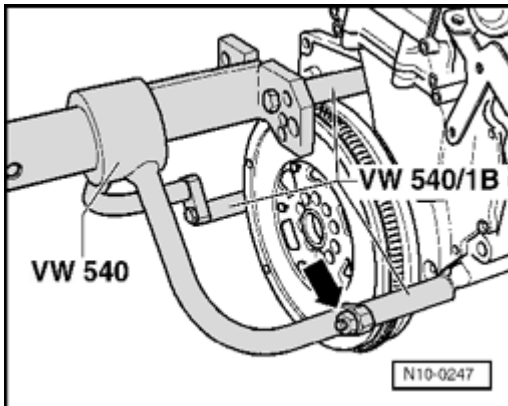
Securing Engine/Transmission Support VW 540 With Parts From Engine And Transmission Support Supplement VW 540/1B To Cylinder Block
